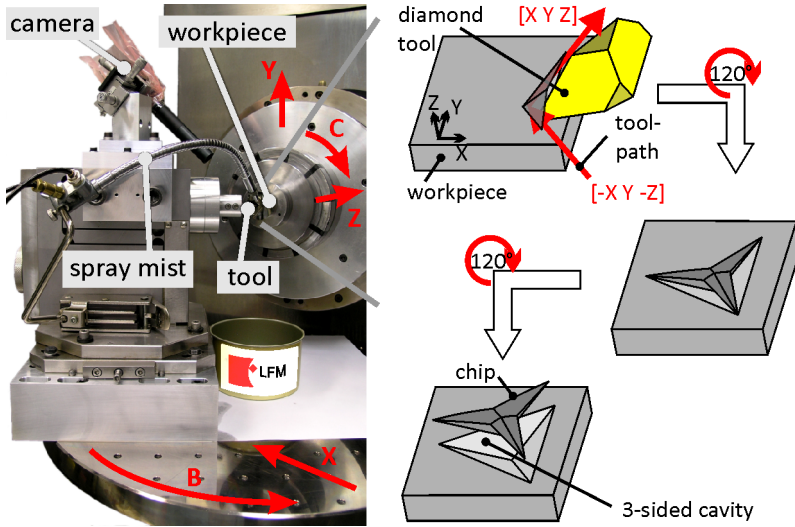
DMC machining setup and exemplary steps for generating a three-sided cavity
